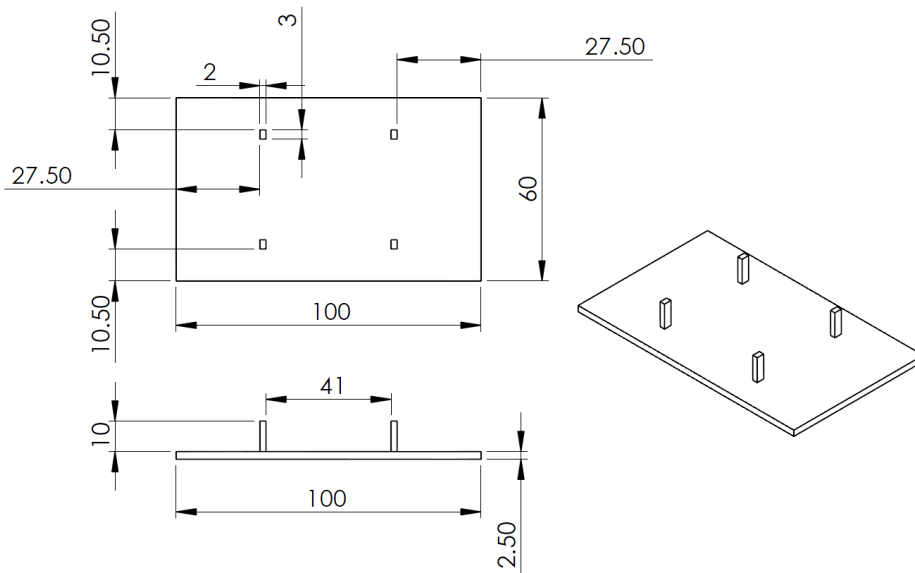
Dimensions [mm] for fabrication tooling (Base-alignment unit)
